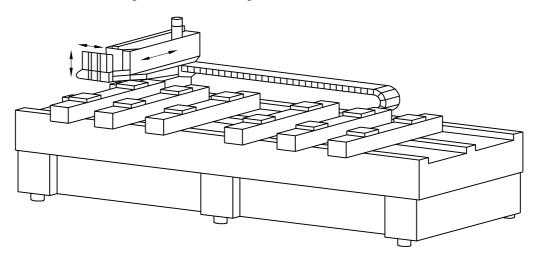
Example 1 of a C frame machine (fixed table, moveable head)
